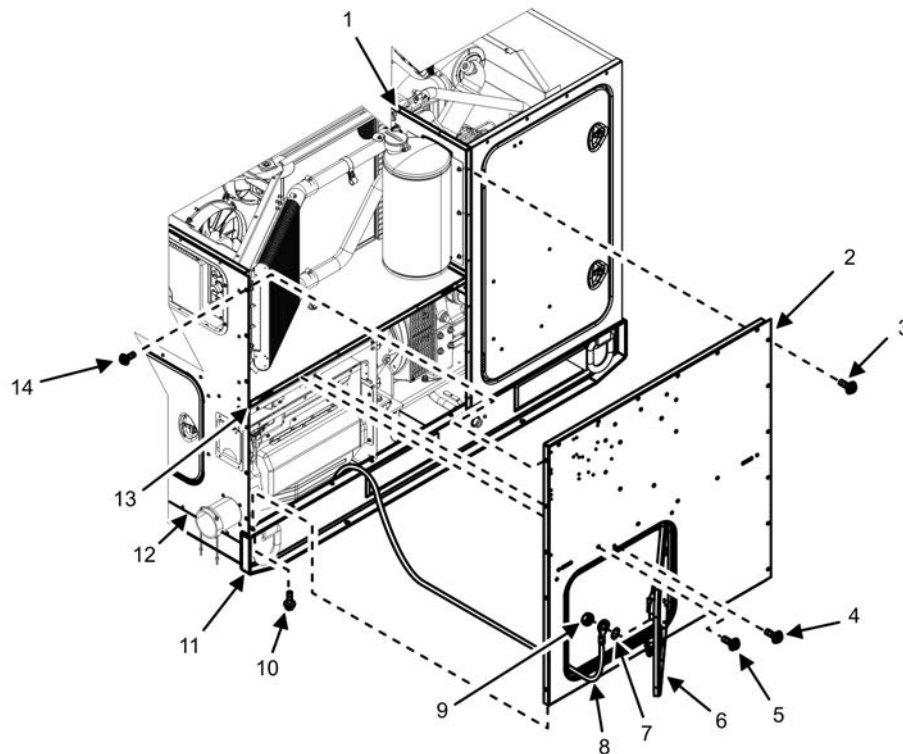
Right-Side Body Panel and Door Frame — Location.
